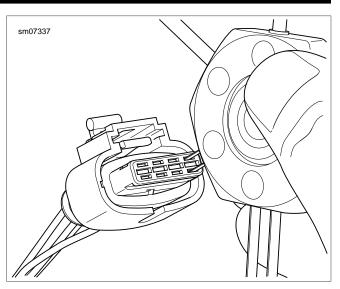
Terminal Removal: Bosch Compact 1.1M Connector
